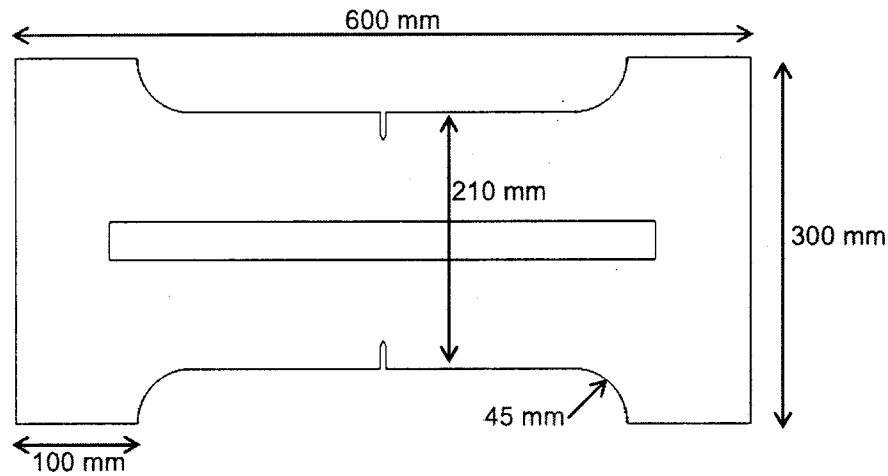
Single Stiffened Double Edge Notched Tension (SSDENT) specimen geometry subjected to quasi-static uniaxial tensile loading (dimensions in mm)
